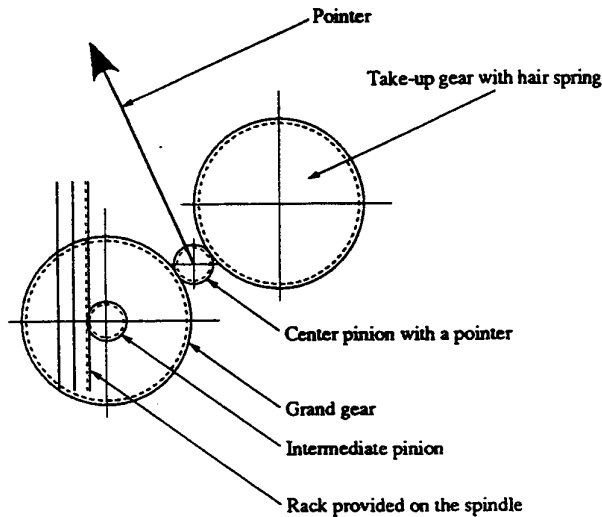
Magnifying mechanism of 0.01mm dial indicators (for today)
